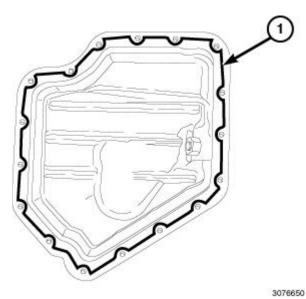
Locating Sealant On Lower Oil Pan Courtesy of CHRYSLER GROUP, LLC
